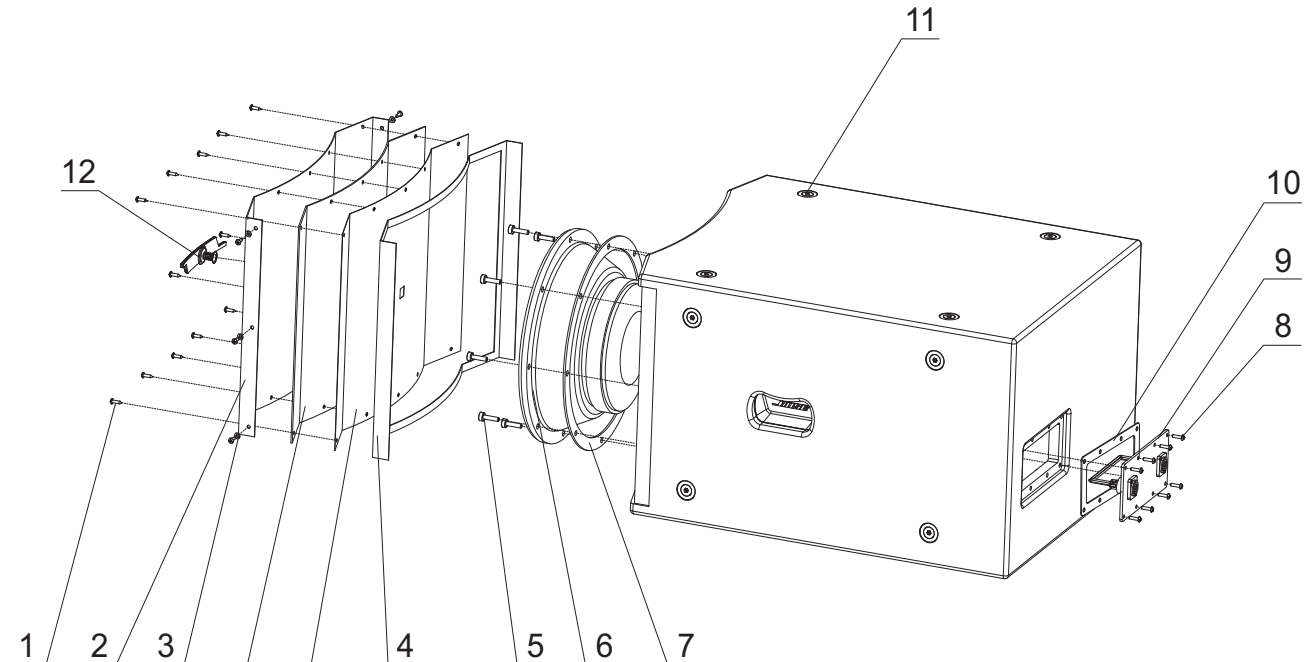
Panaray LT MB12 WR Bass Loudspeaker Exploded View
